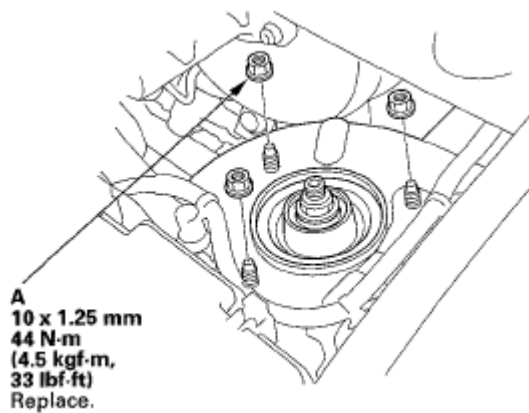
Identifying Damper Flange Nuts With Torque Specification
